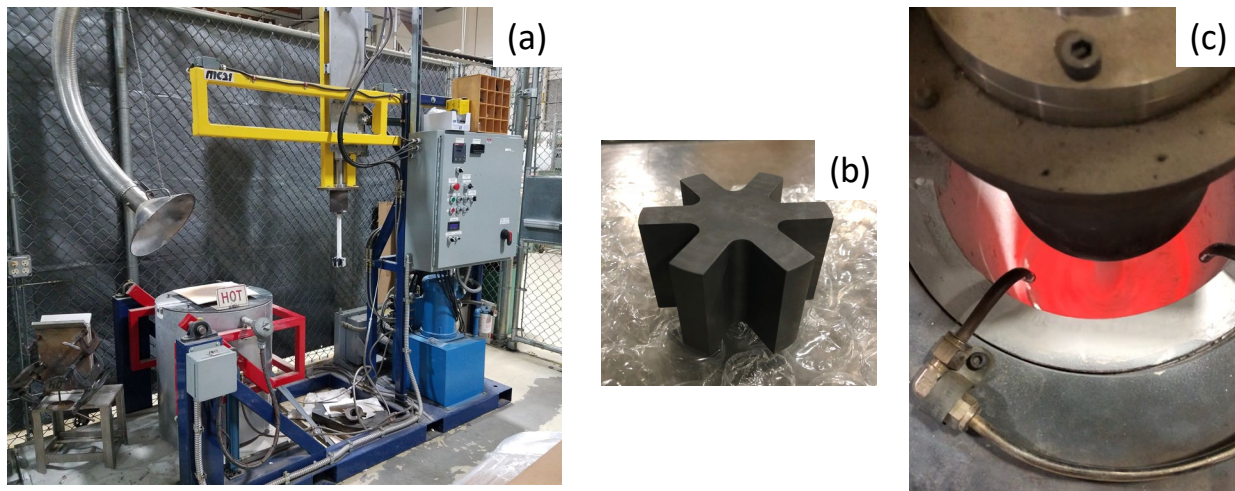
(a) Tilt-pour stir casting equipment at PNNL used for the casting trials; (b) star-design bladed impeller installed in mixer head; and (c) close-up of the stir casting process. Source: PNNL.
